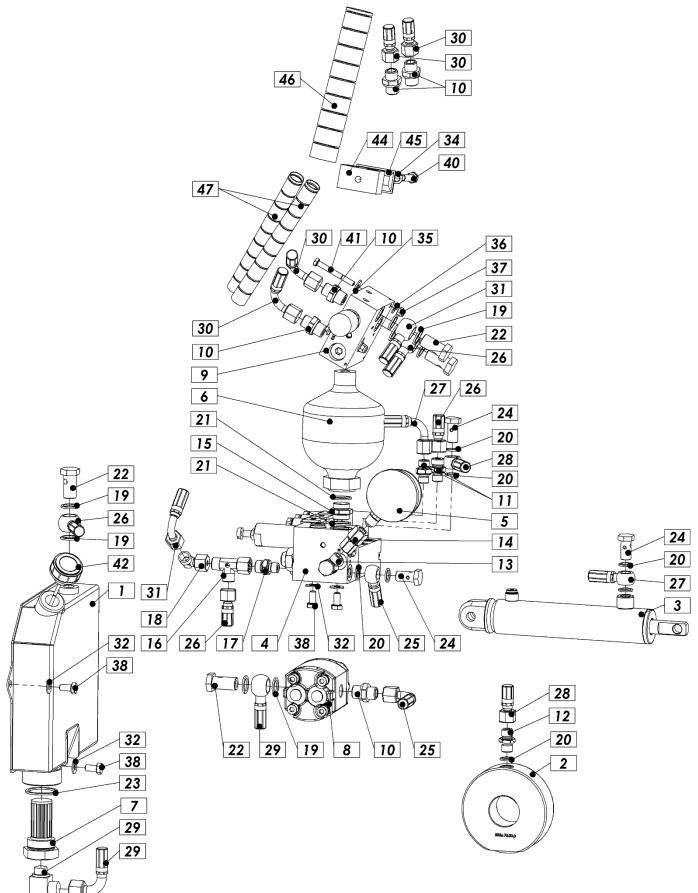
5006.32.15.0 – Hydraulic assembly 55Hpro.
